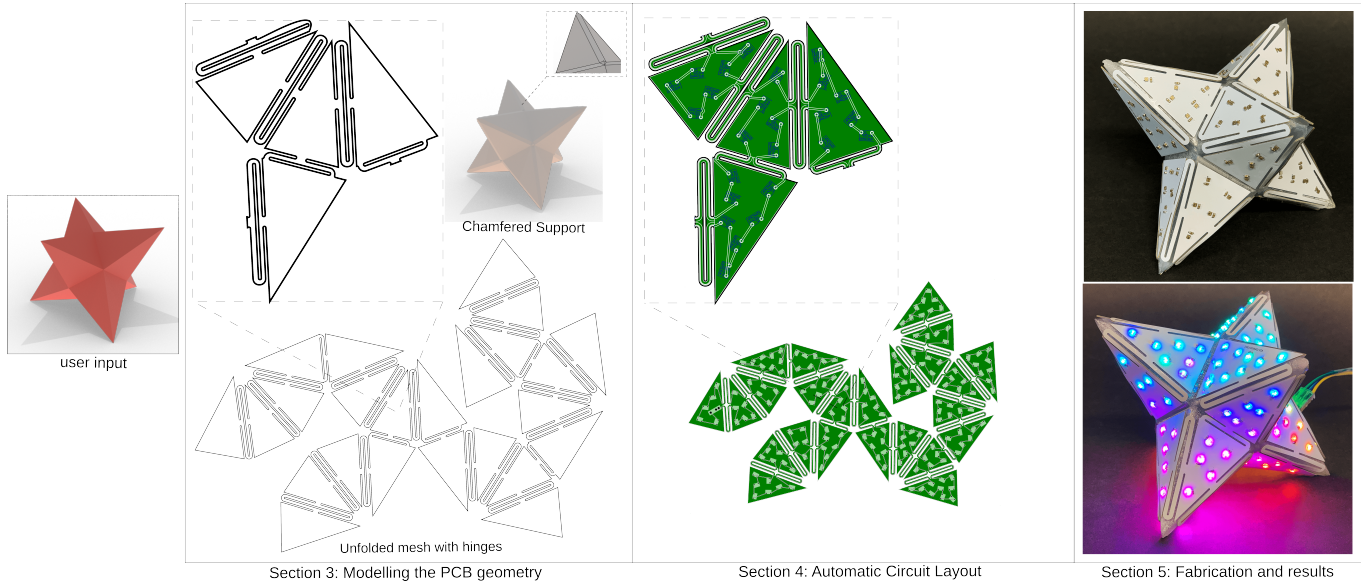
From the user input mesh, our method starts by modeling the PCB geometry, making it foldable with hinge patterns (Section 3). LEDs are then placed, the circuit optimized and routed to obtain fabrication-ready PCB blueprints (Section 4). A chamfered support mesh is also generated. The PCB is then folded onto the 3D printed support. The assembled model is finally ready to display visual patterns (Section 5).
